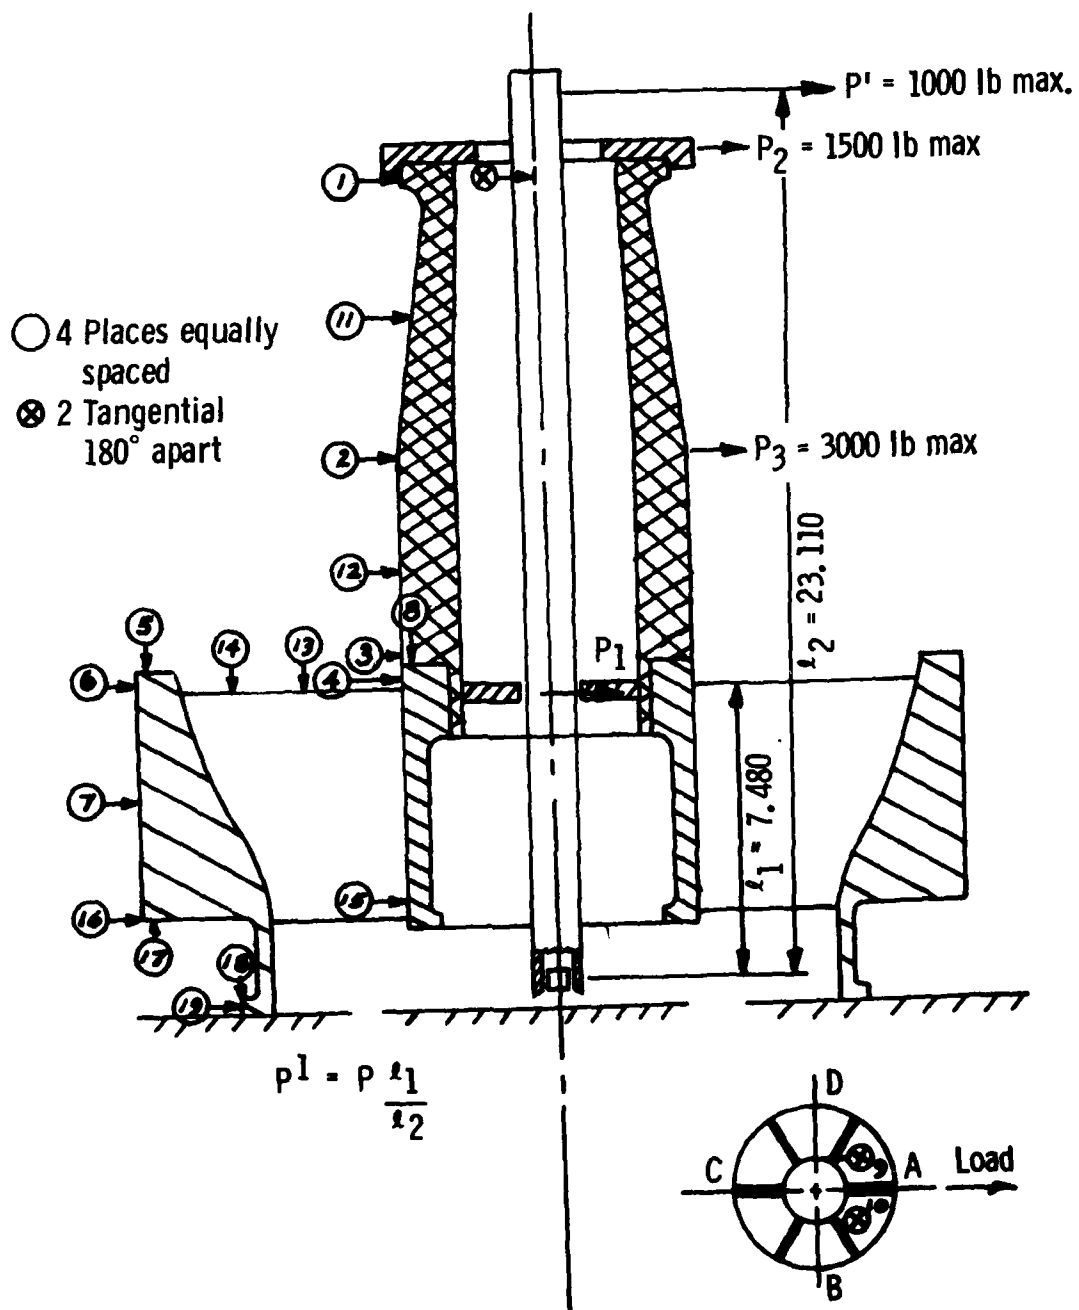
Test Setup for Torquemeter Housing Static Load Test.
